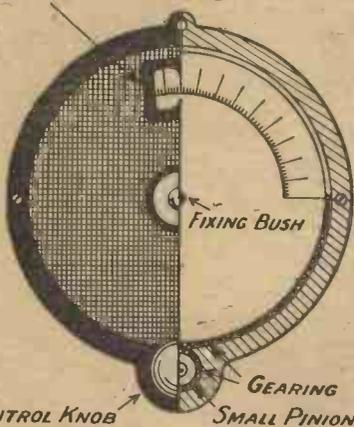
This form of geared dial is rotated by means of the small knob at the bottom, which turns a pinion engaging with the large gear wheel fixed on the spindle.
